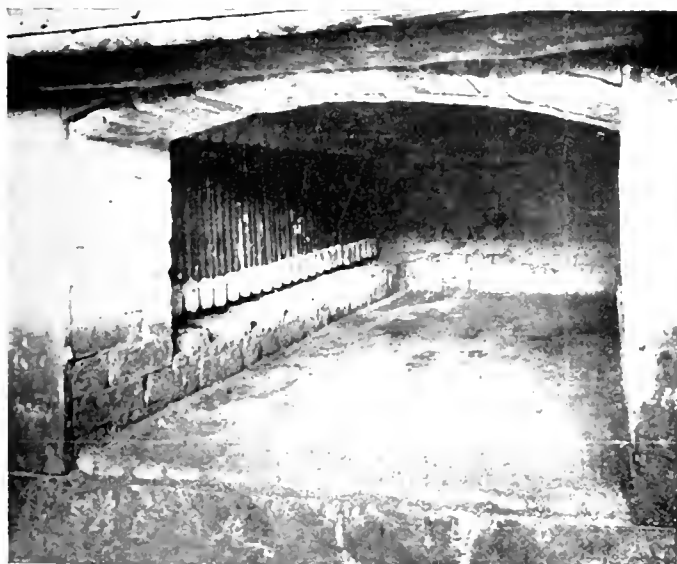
Interior View of Box Furnace Used for Carbonizing
